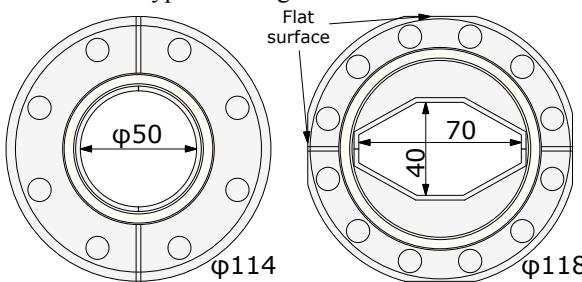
Two types of flanges for the cERL beam ducts: (left) round cross-section for straight sections, (right) oblong octagon for arc sections.
